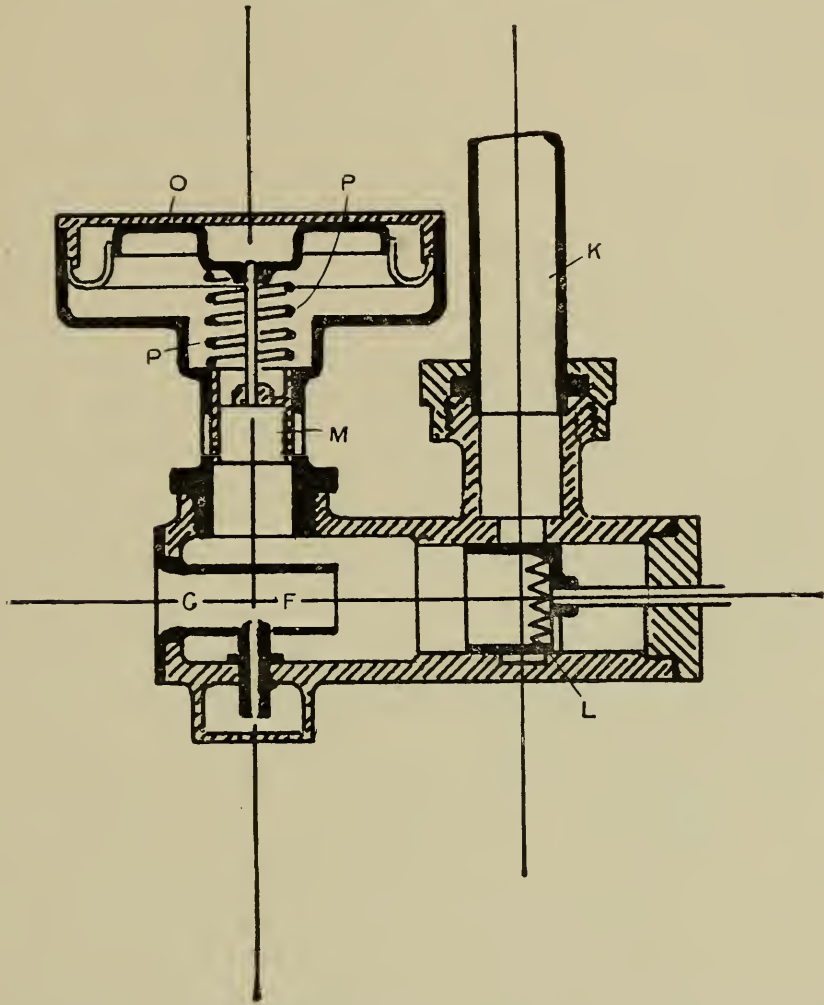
Krebs Carburettor, in which the opening to the extra air supply is controlled by the suction of the engine.
